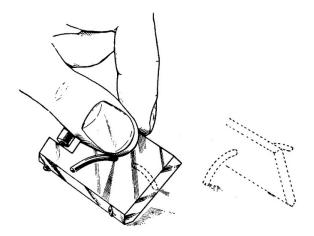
"Rocking" Tool for Polishing an Edge Rounded
